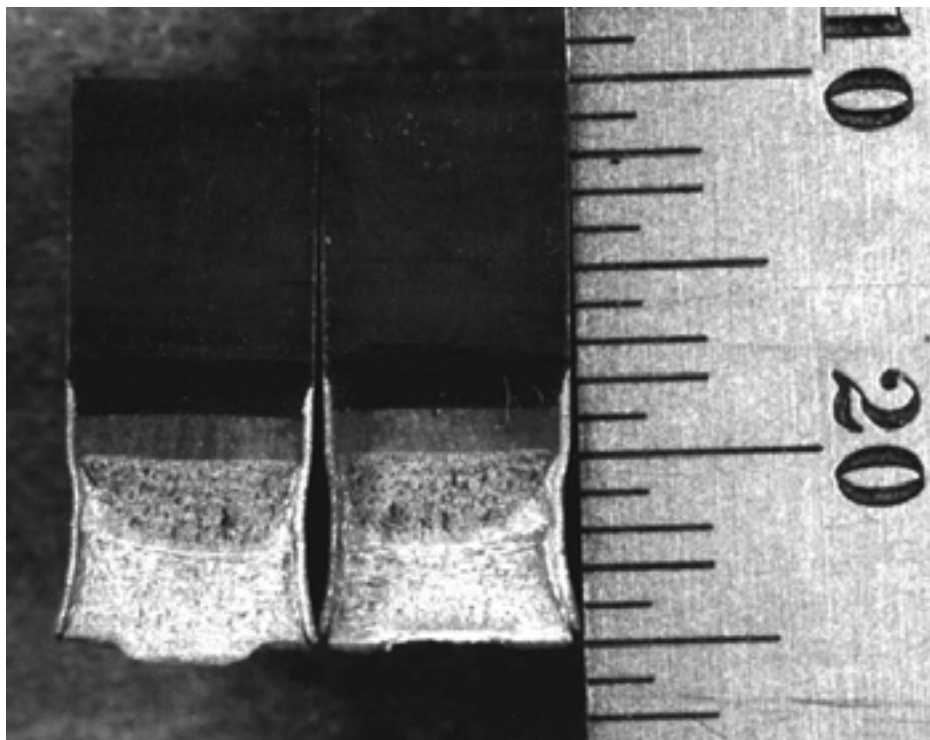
Fracture surface of specimen L20-D tested at 288°C
